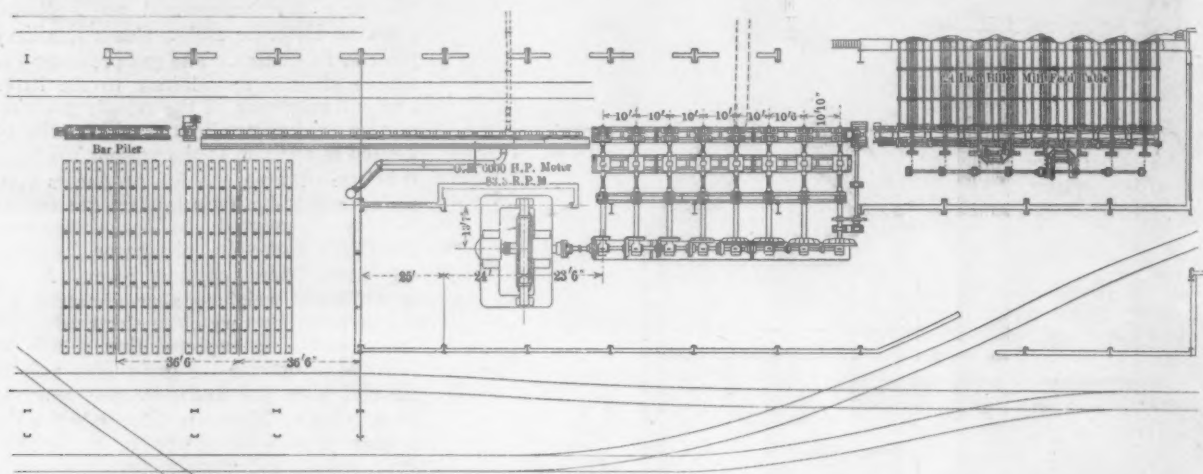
Lay-out of the Gary 18-inch Continuous Sheet-Bar Mill, showing Its Relation to the 24-inch Billet Mill.
